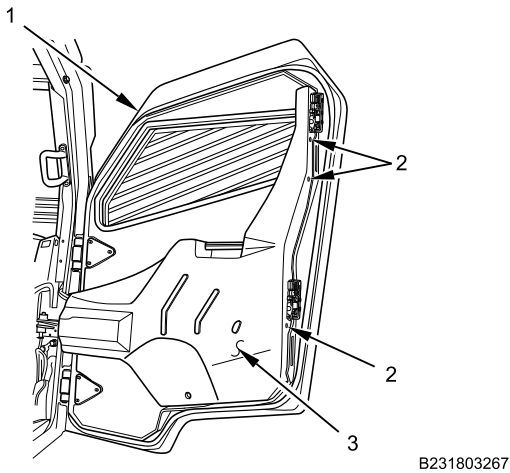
Cabin Door Trim Panel Fasteners Removal.
